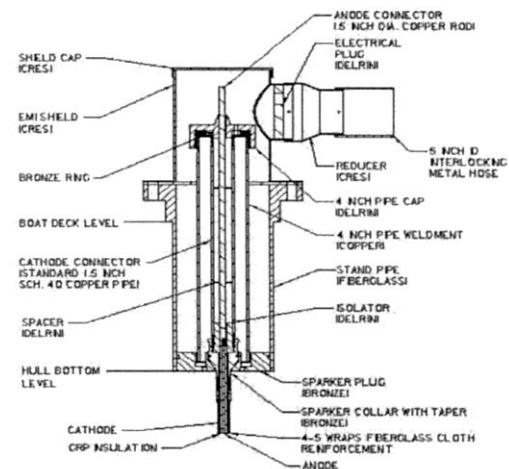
Cross-section view of sparker assembly mounted in standpipe structure.
